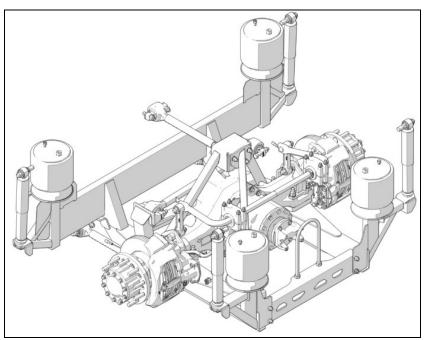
DRIVE AXLE, DETAILS OF REAR SUSPENSION16106
